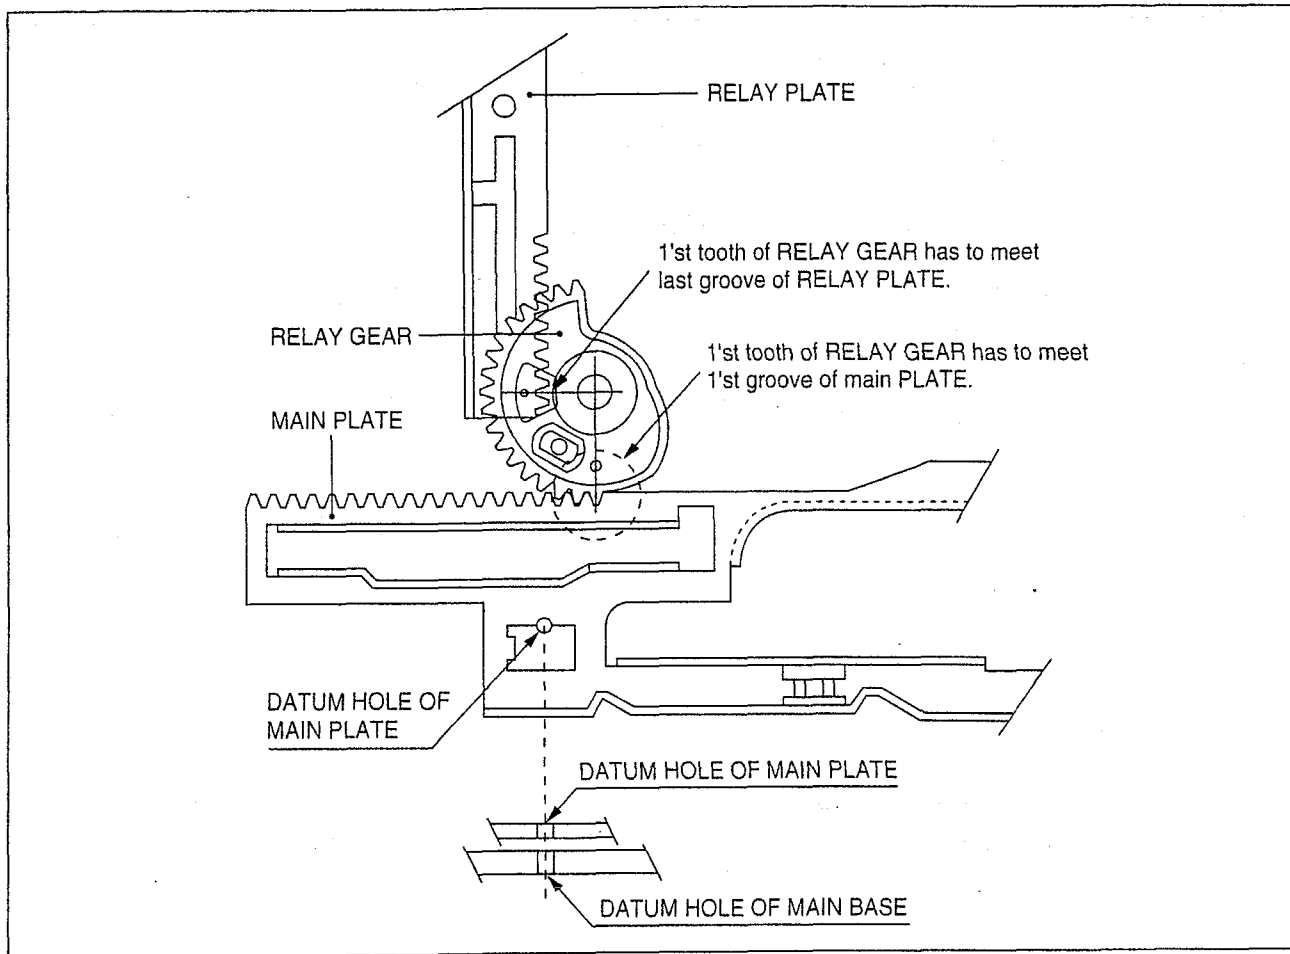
DATUM POSITION OF MAIN PLATE & RELAY GEAR
